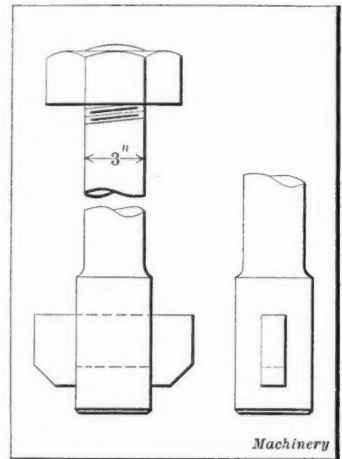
Type of Foundation Bolt for which Dimensions are to be determined
